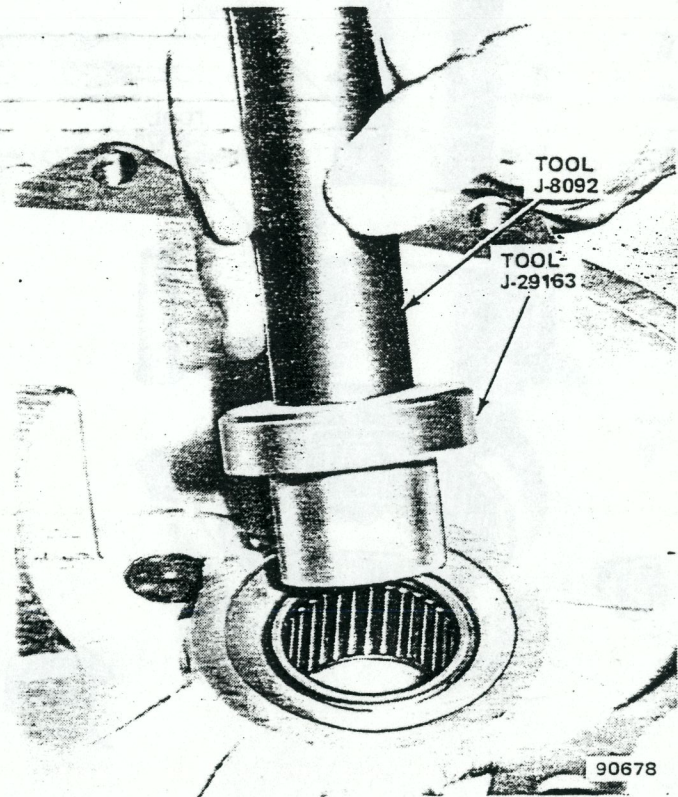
D-30 Front Output Shaft Rear Bearing Installation
